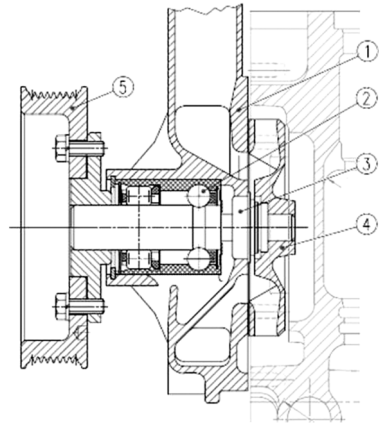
Water Pump with pulley (① Housing, ② Bearing, ③ Seal, ④ Impeller, ⑤ Pulley)
